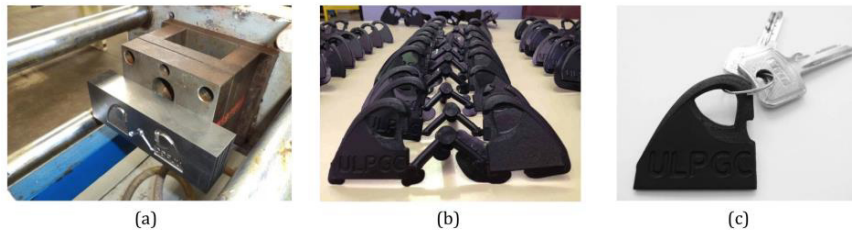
(a) Prototype mould; (b) pre-serial injection; (c) end part injected.
